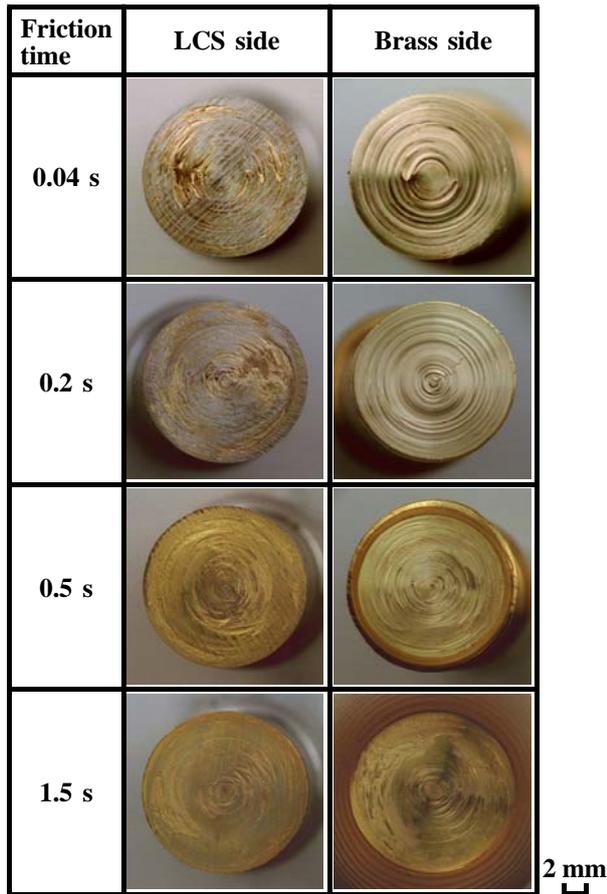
shows the examples of the appearances of the weld interfaces after welding under friction pressure of 30 MPa. When a friction time was 0.04 s, i.e. both specimens had been rotated once, brass transferred around the half radius region of the weld interface on the LCS side. In addition, the concentric rubbing marks were observed at
